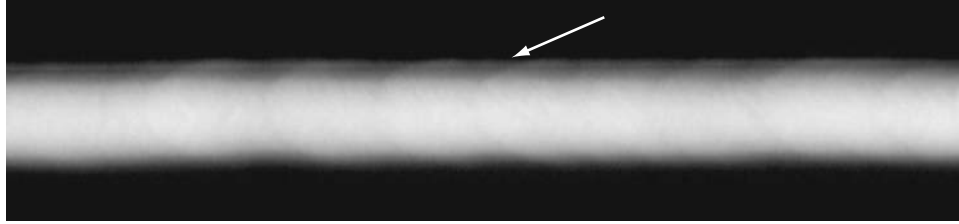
Radiograph of JT-08 taken +10° off perpendicular. The linear indication caused by lack of fusion can be seen along the top of the crown reinforcement. Weld direction is left to right.
